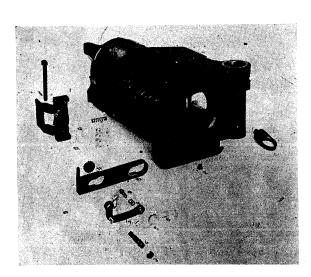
BREECHRING WITH BARREL AND HYDRAULIC RECOIL BRAKE CONECTION
